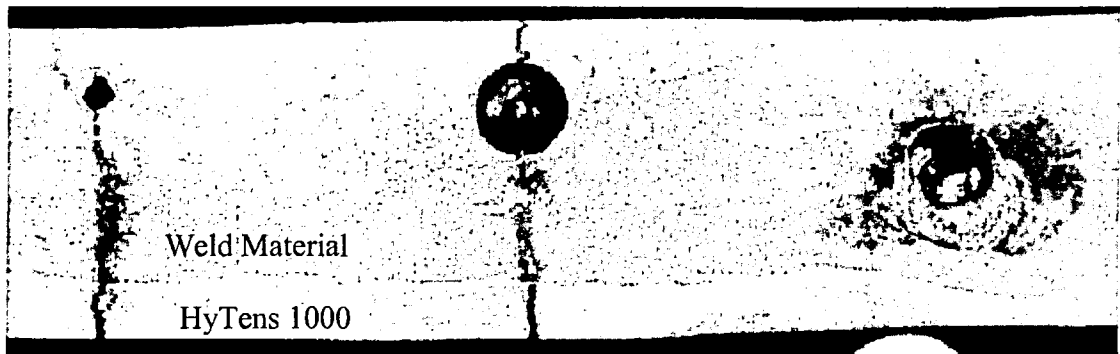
Macro Image of a Longitudinal Section Through an Lap Joint using HyTens 1000 Stainless, Cracks are Shown to go through the Full Thickness of the Weld and often Coincide with Porosity.
